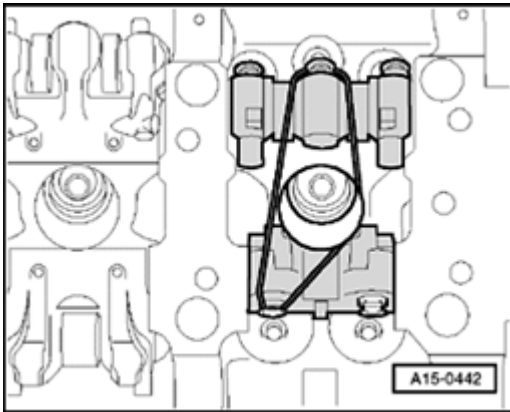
Turning Roller Rocker Lever Upward And Securing It With Rubber Band
